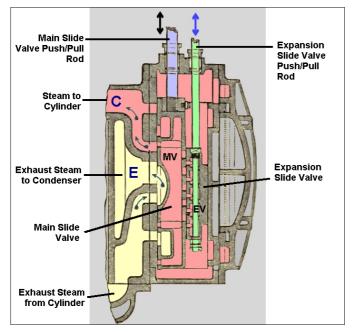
, View of the steam supply and steam chests on the cylinder port side.
